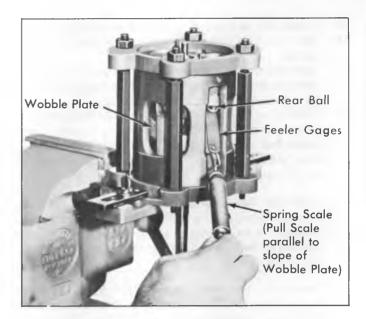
Checking Clearance Between Rear Ball and Wobble
